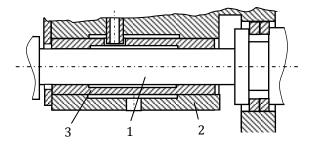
Bearing with non-rotating ring: 1 – rotor, 2 – hull, 3 – non-rotating ring.
